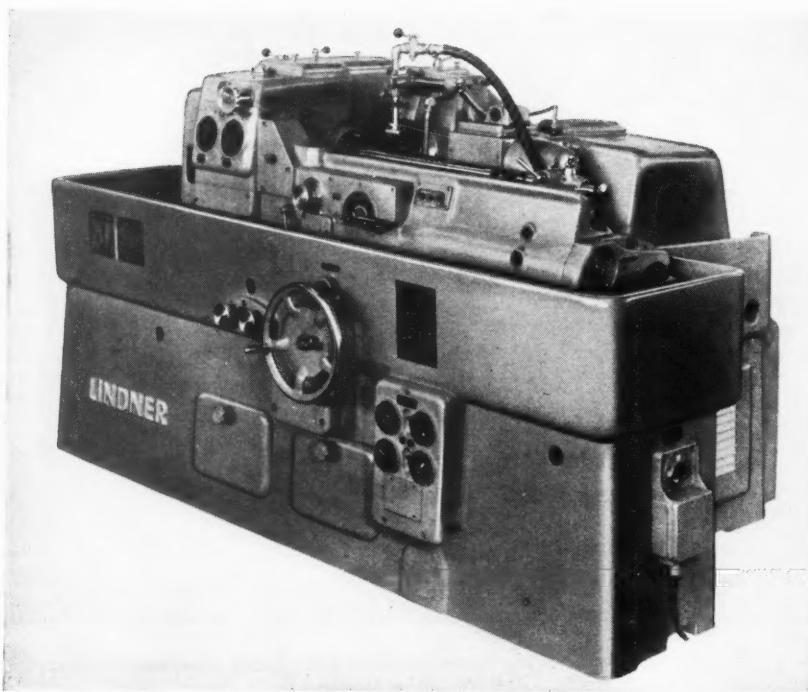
Lindner standard type grinding machine introduced in this country by the Kurt Orban Co., Inc.
